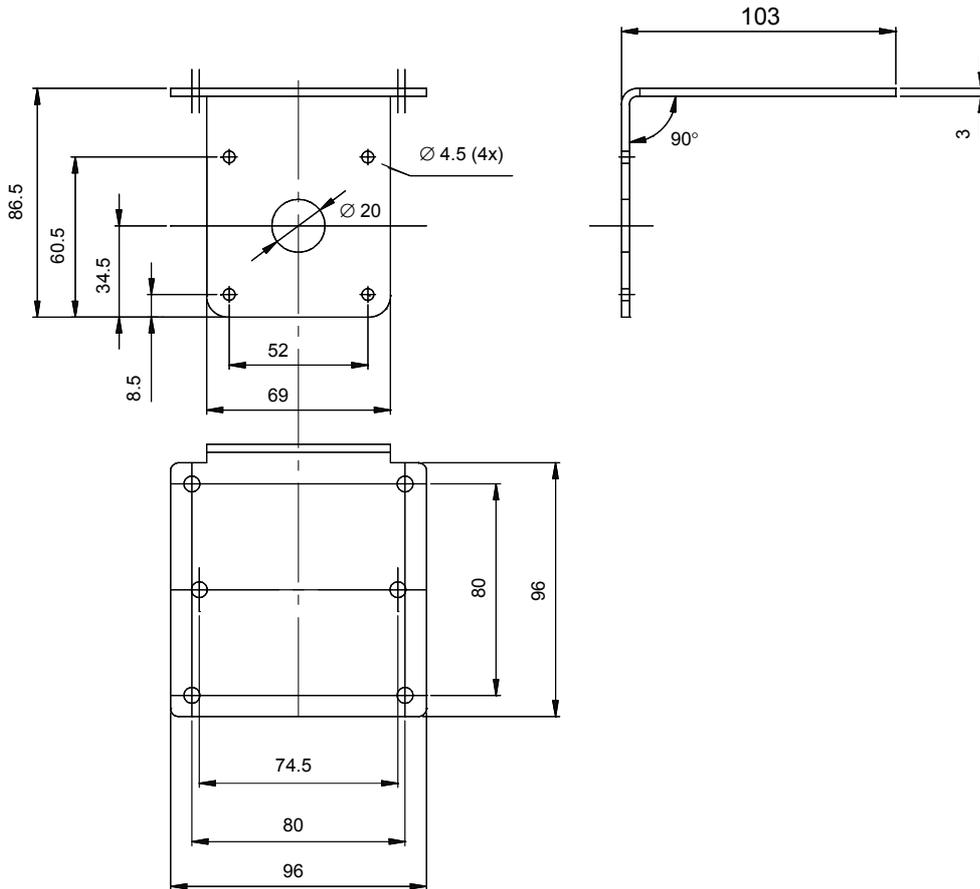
Mounting bracket A4021A for VQ400 and VE5000 Series in millimeters.
